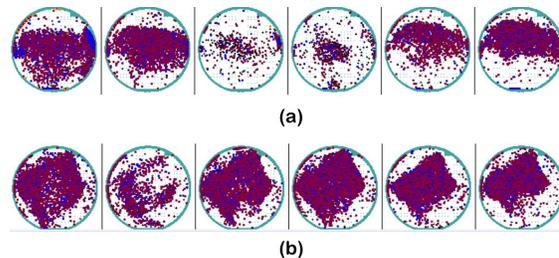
Wafer splits with different tools. (a) Processed with 0° configuration tool: Tool 1; (b) Processed with 90° configuration tool: Tool 4.
